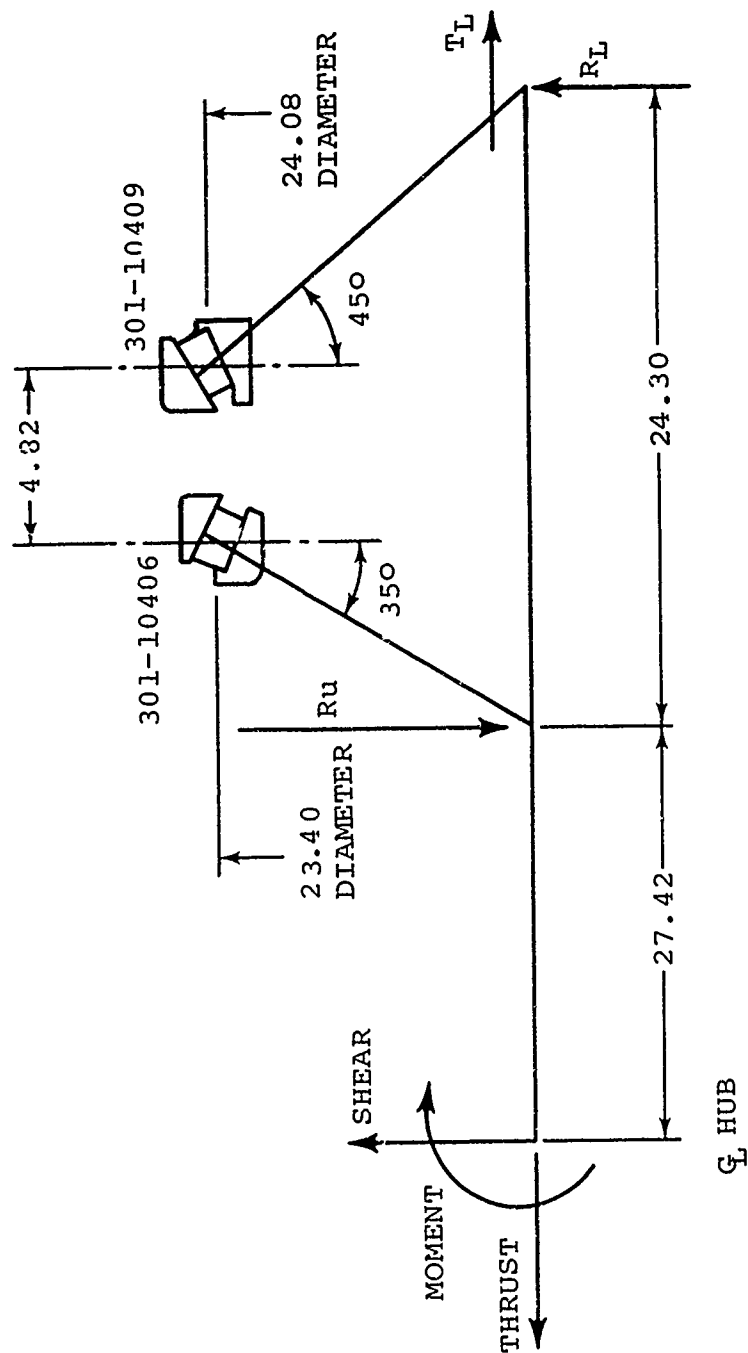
HLH Aft Rotor Shaft Bearing Configuration.
